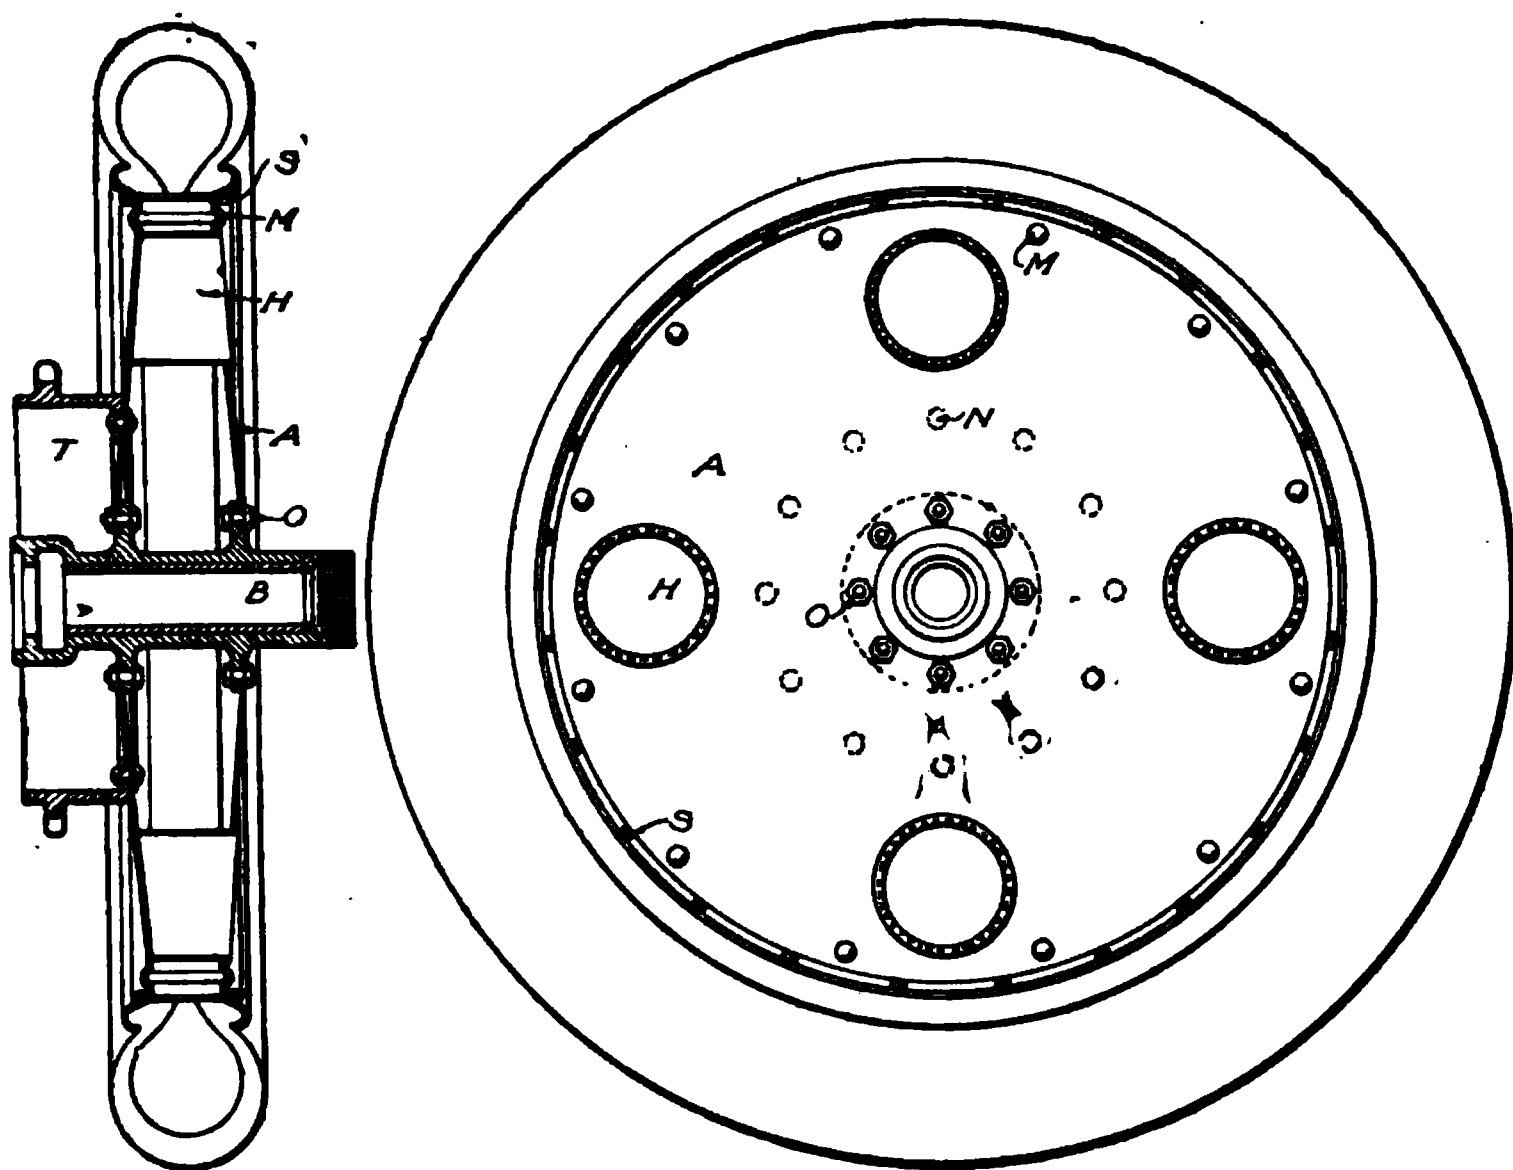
Side and Sectional Views of Sheet-Steel Wheels
